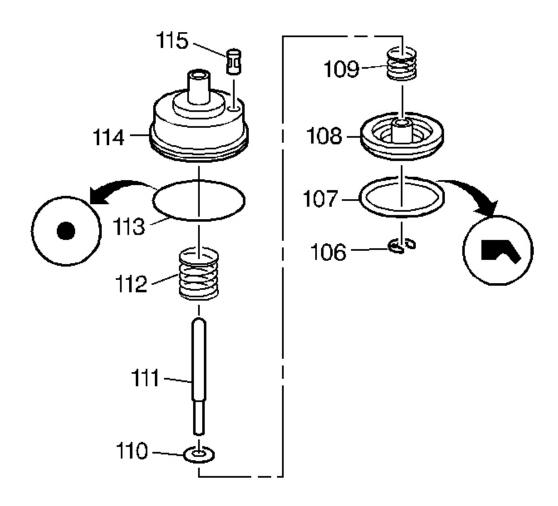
Assembling Components Of 2-1 Manual Band Servo Courtesy of GENERAL MOTORS CORP.
